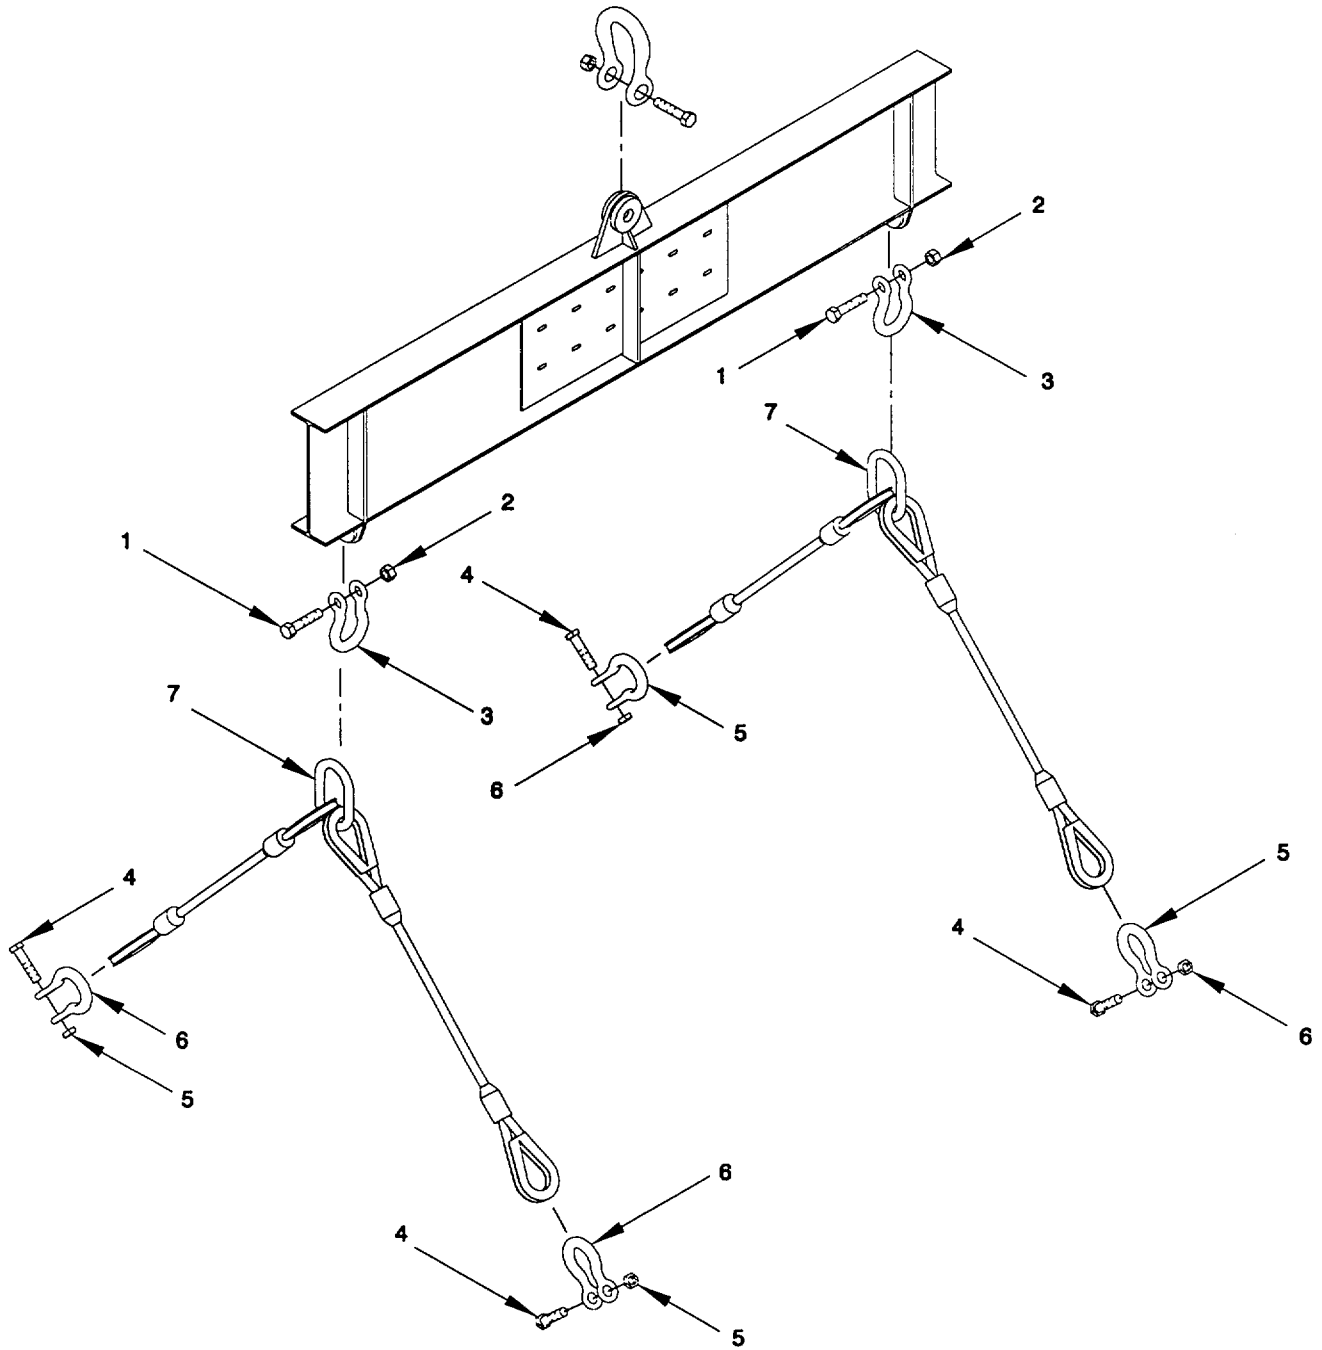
Spreader Assembly Bridle Sling, Remove/Install.
